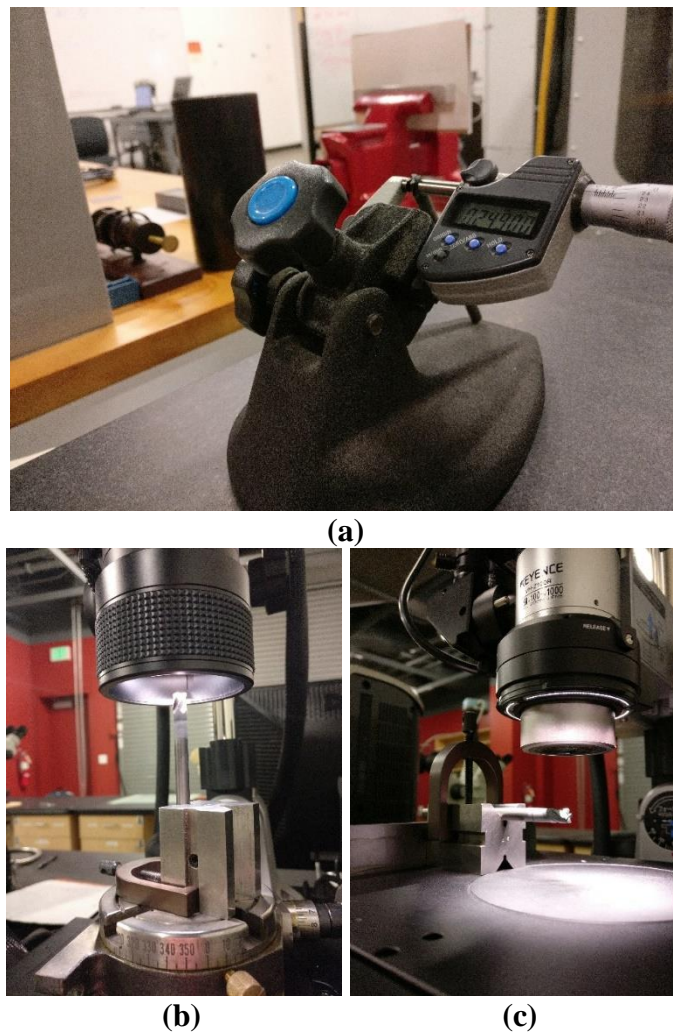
Various orientations to measure cutting tool geometry (a) micrometer measuring cutting tool diameter (b) top view measuring rake angle and edge radius (c) side view measuring corner radius and helix angle.
